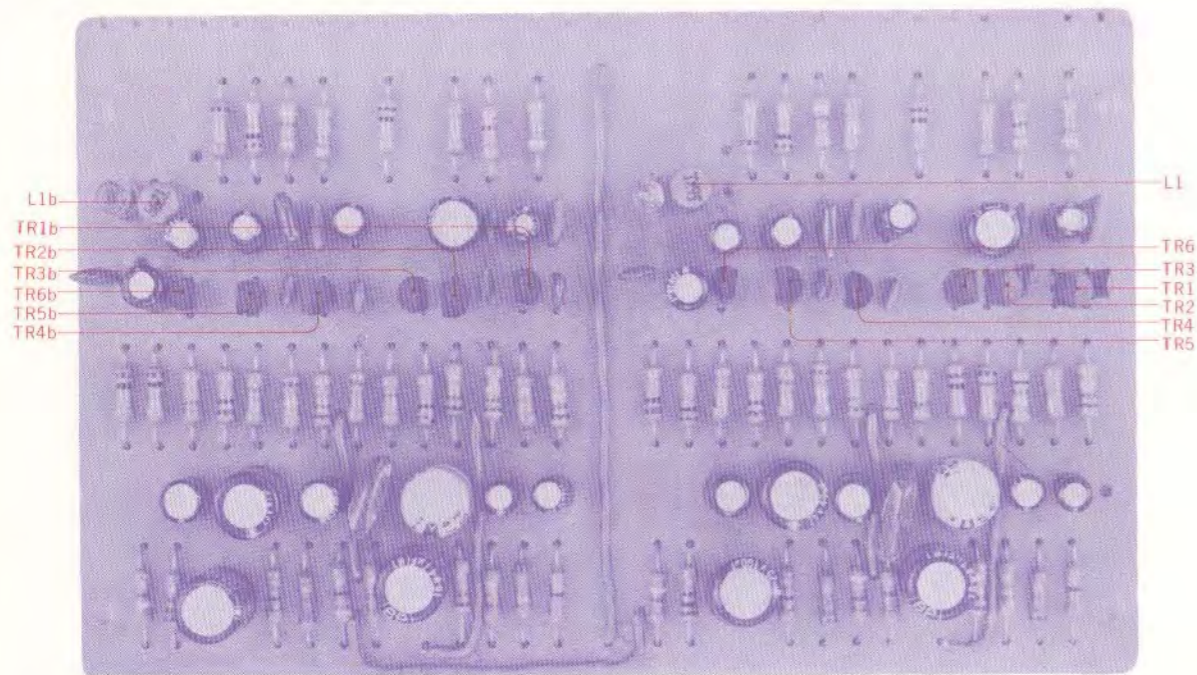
PHOTO OF OSC. P.C. BOARD (KJ-5023) BLOCK
